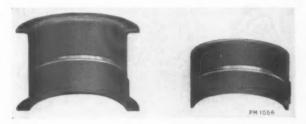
Steel-backed babbitt-lined bearings in two types and twelve sizes grooved automatically.
